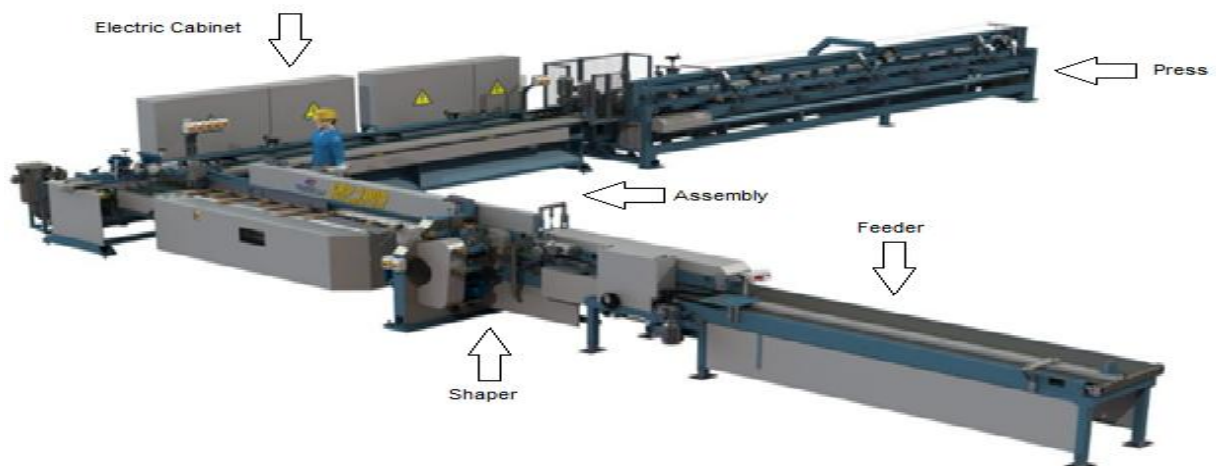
finger jointing machine. Arrow pointing the each sections [4]
